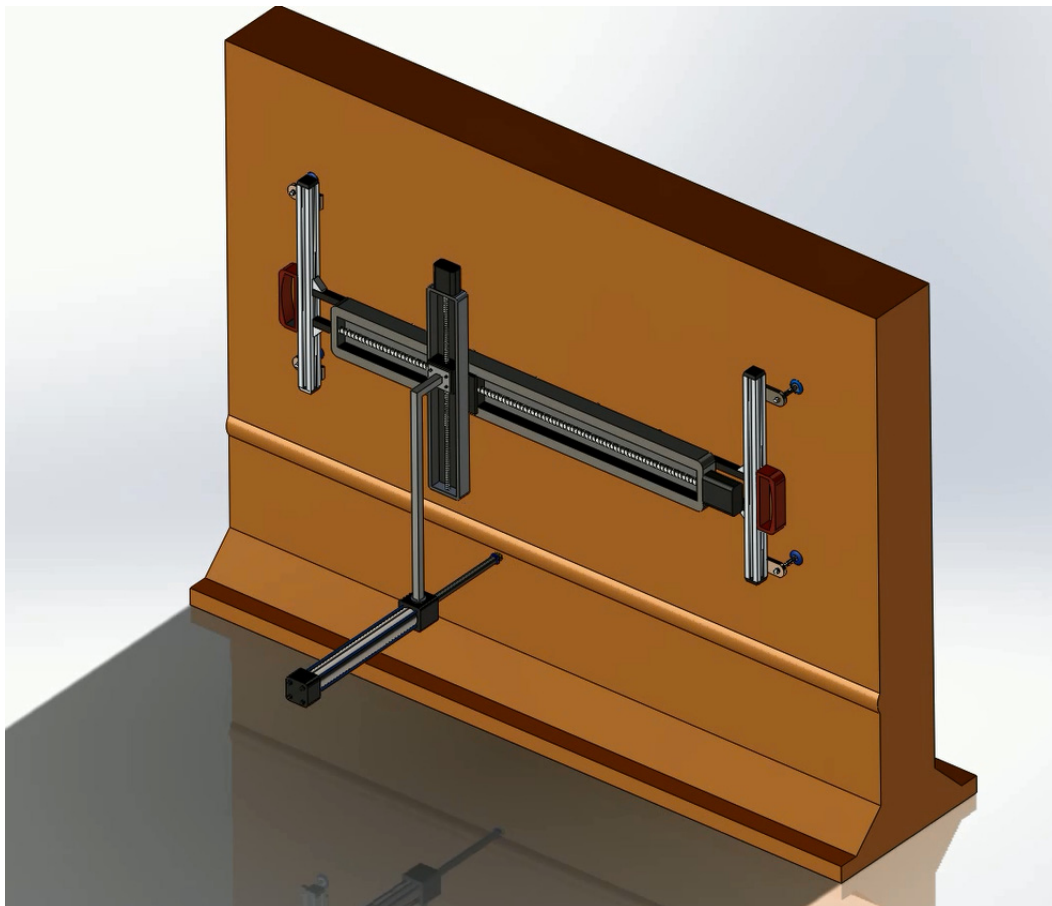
Final PolyTank scanner concept design for the side wall and pipe welds.
